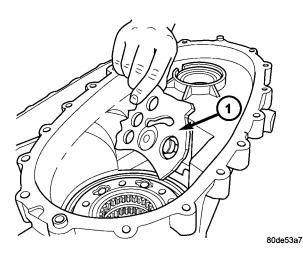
Remove Shift Sector 1 - SHIFT SECTOR
